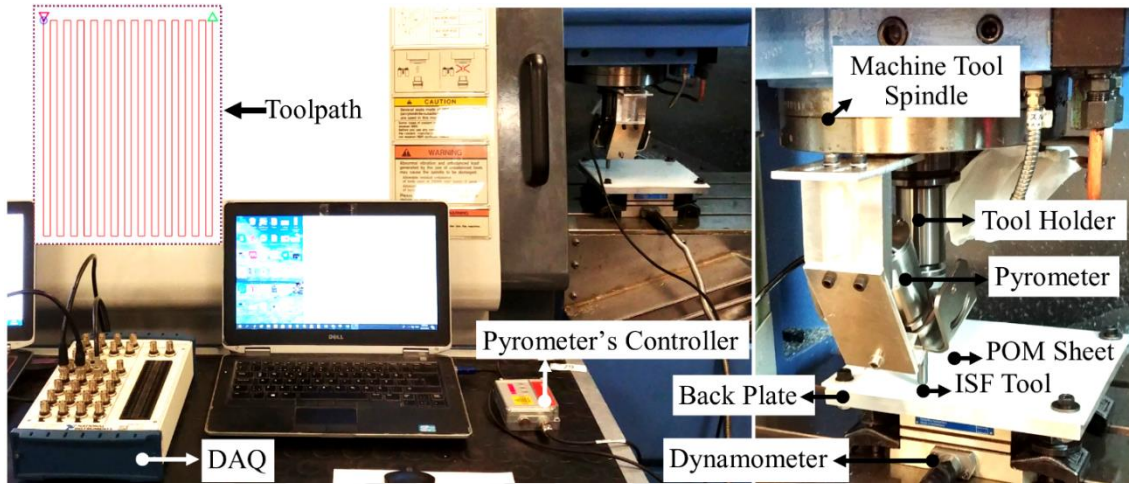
Friction measurement setup including the pyrometer mounted on the machine tool spindle.
